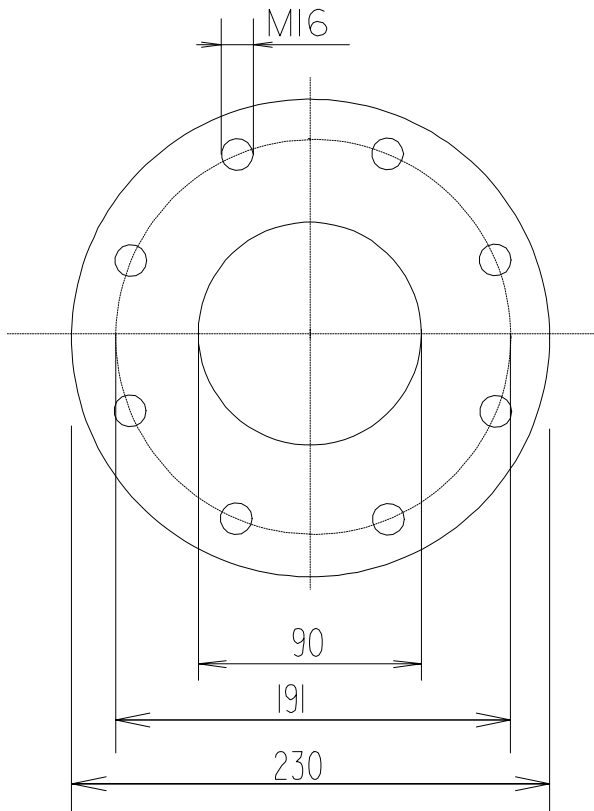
Dimensions of the probes KES-500x with cooling protection tube
